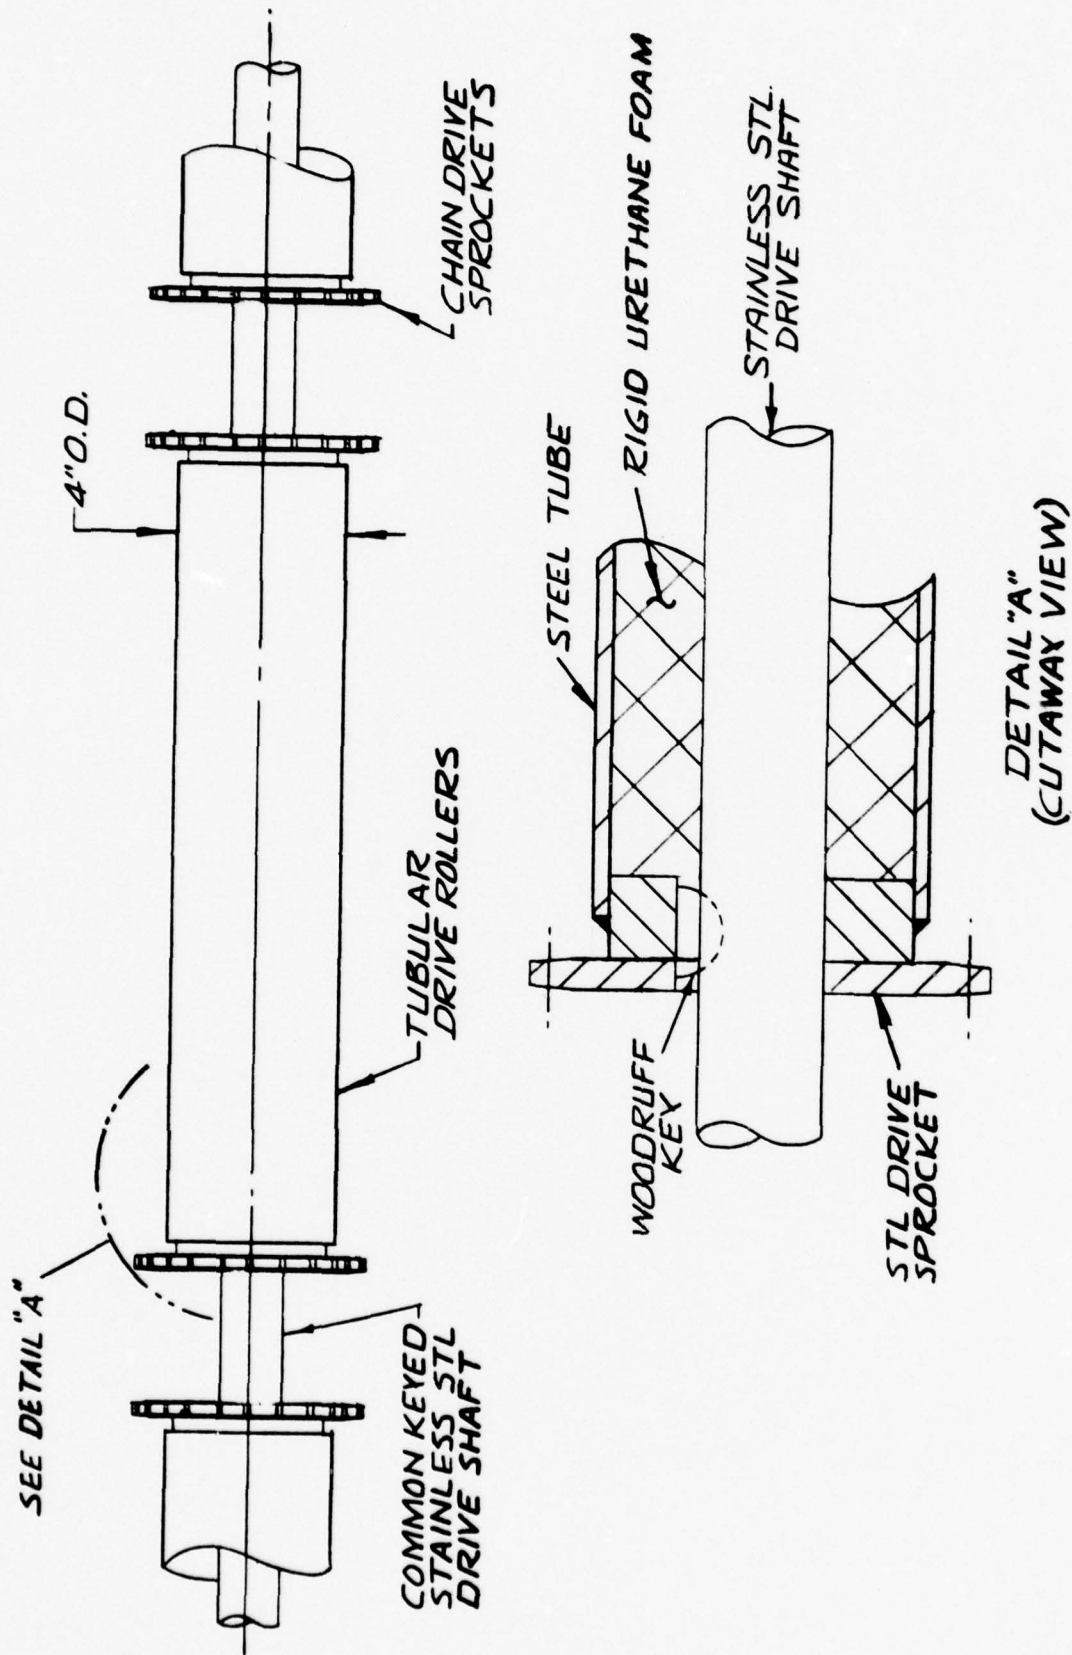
FRONT DRIVE ROLLER CONSTRUCTION
